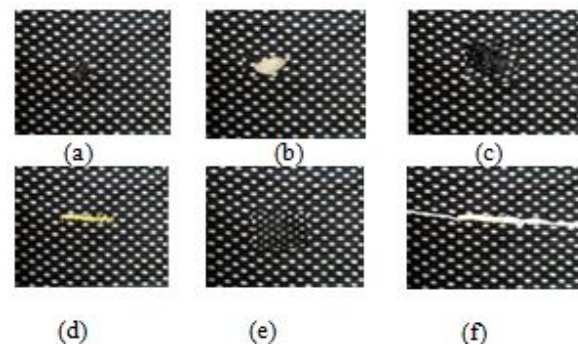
Different fabric defects like (a) Broken end (b) hole (c) Knot (d) Multiple thread (e) Oil strain (f) Thin Bar
